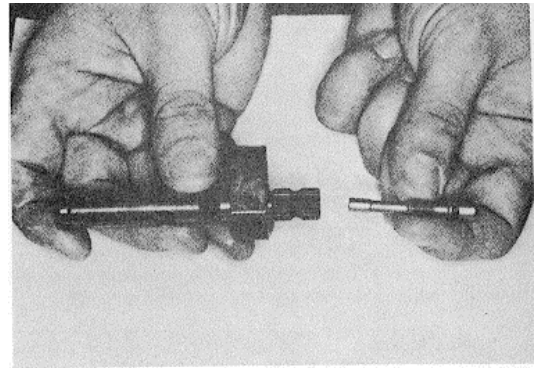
, F5307. Installing fuel adjusting screw in throttle shaft
